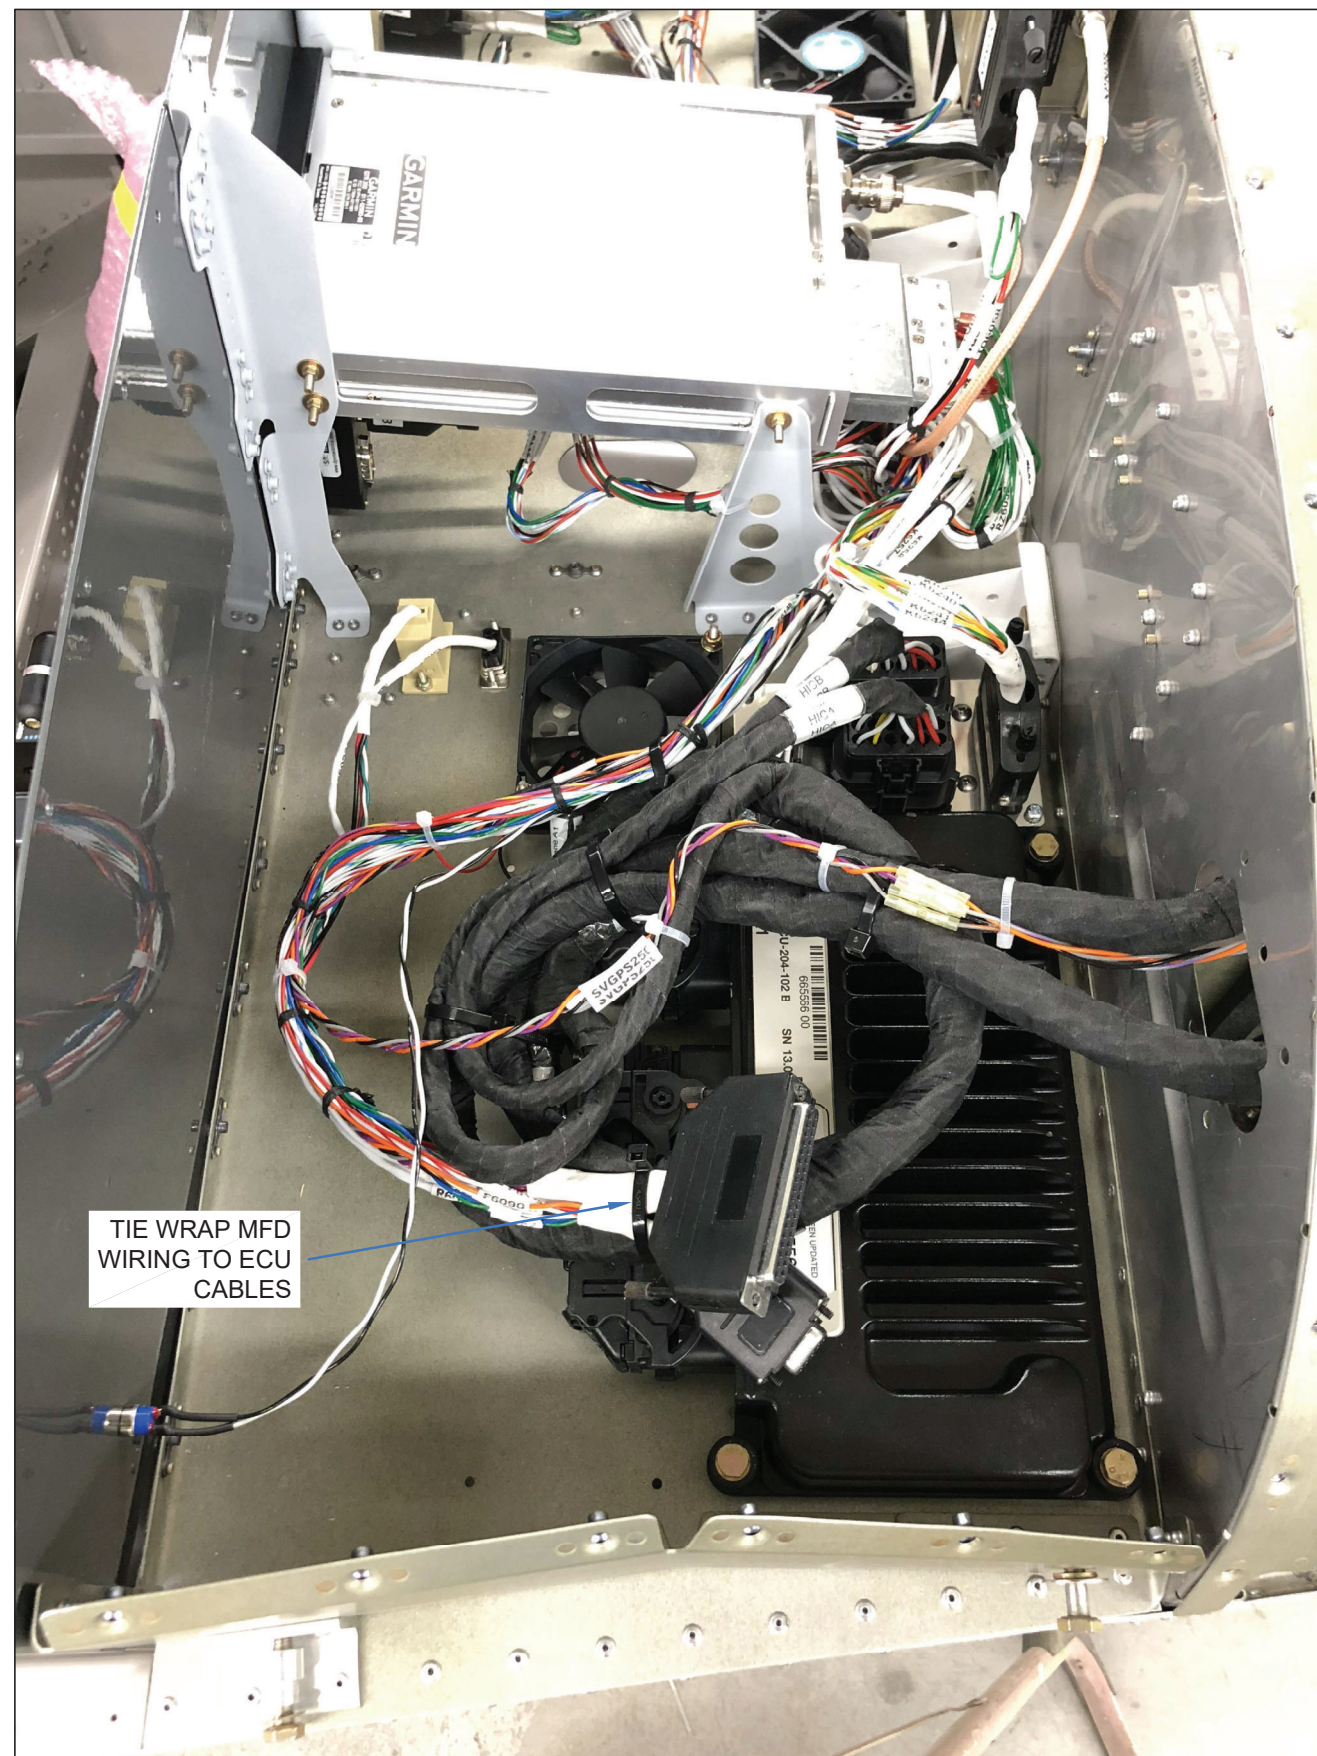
WIRE ROUTING - RIGHT SIDE & MFD WIRING
